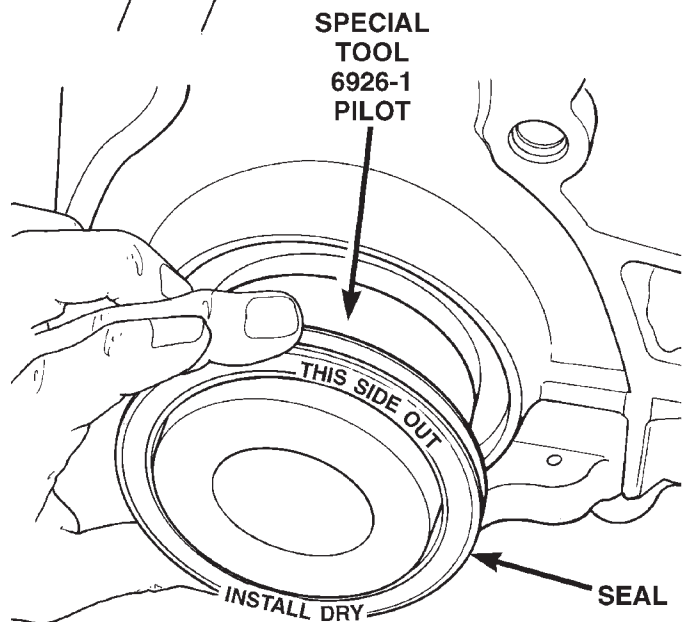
Rear Crankshaft Seal and SpecialTool 6926-1
